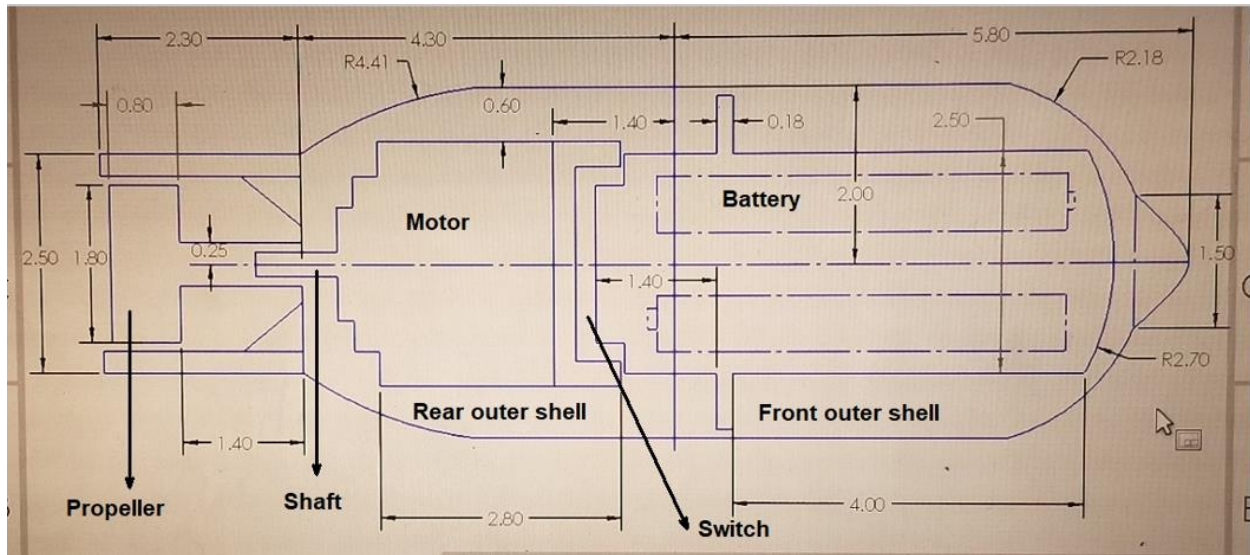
Showing inside view of the penguin when connected and dimensions are given in cm.
